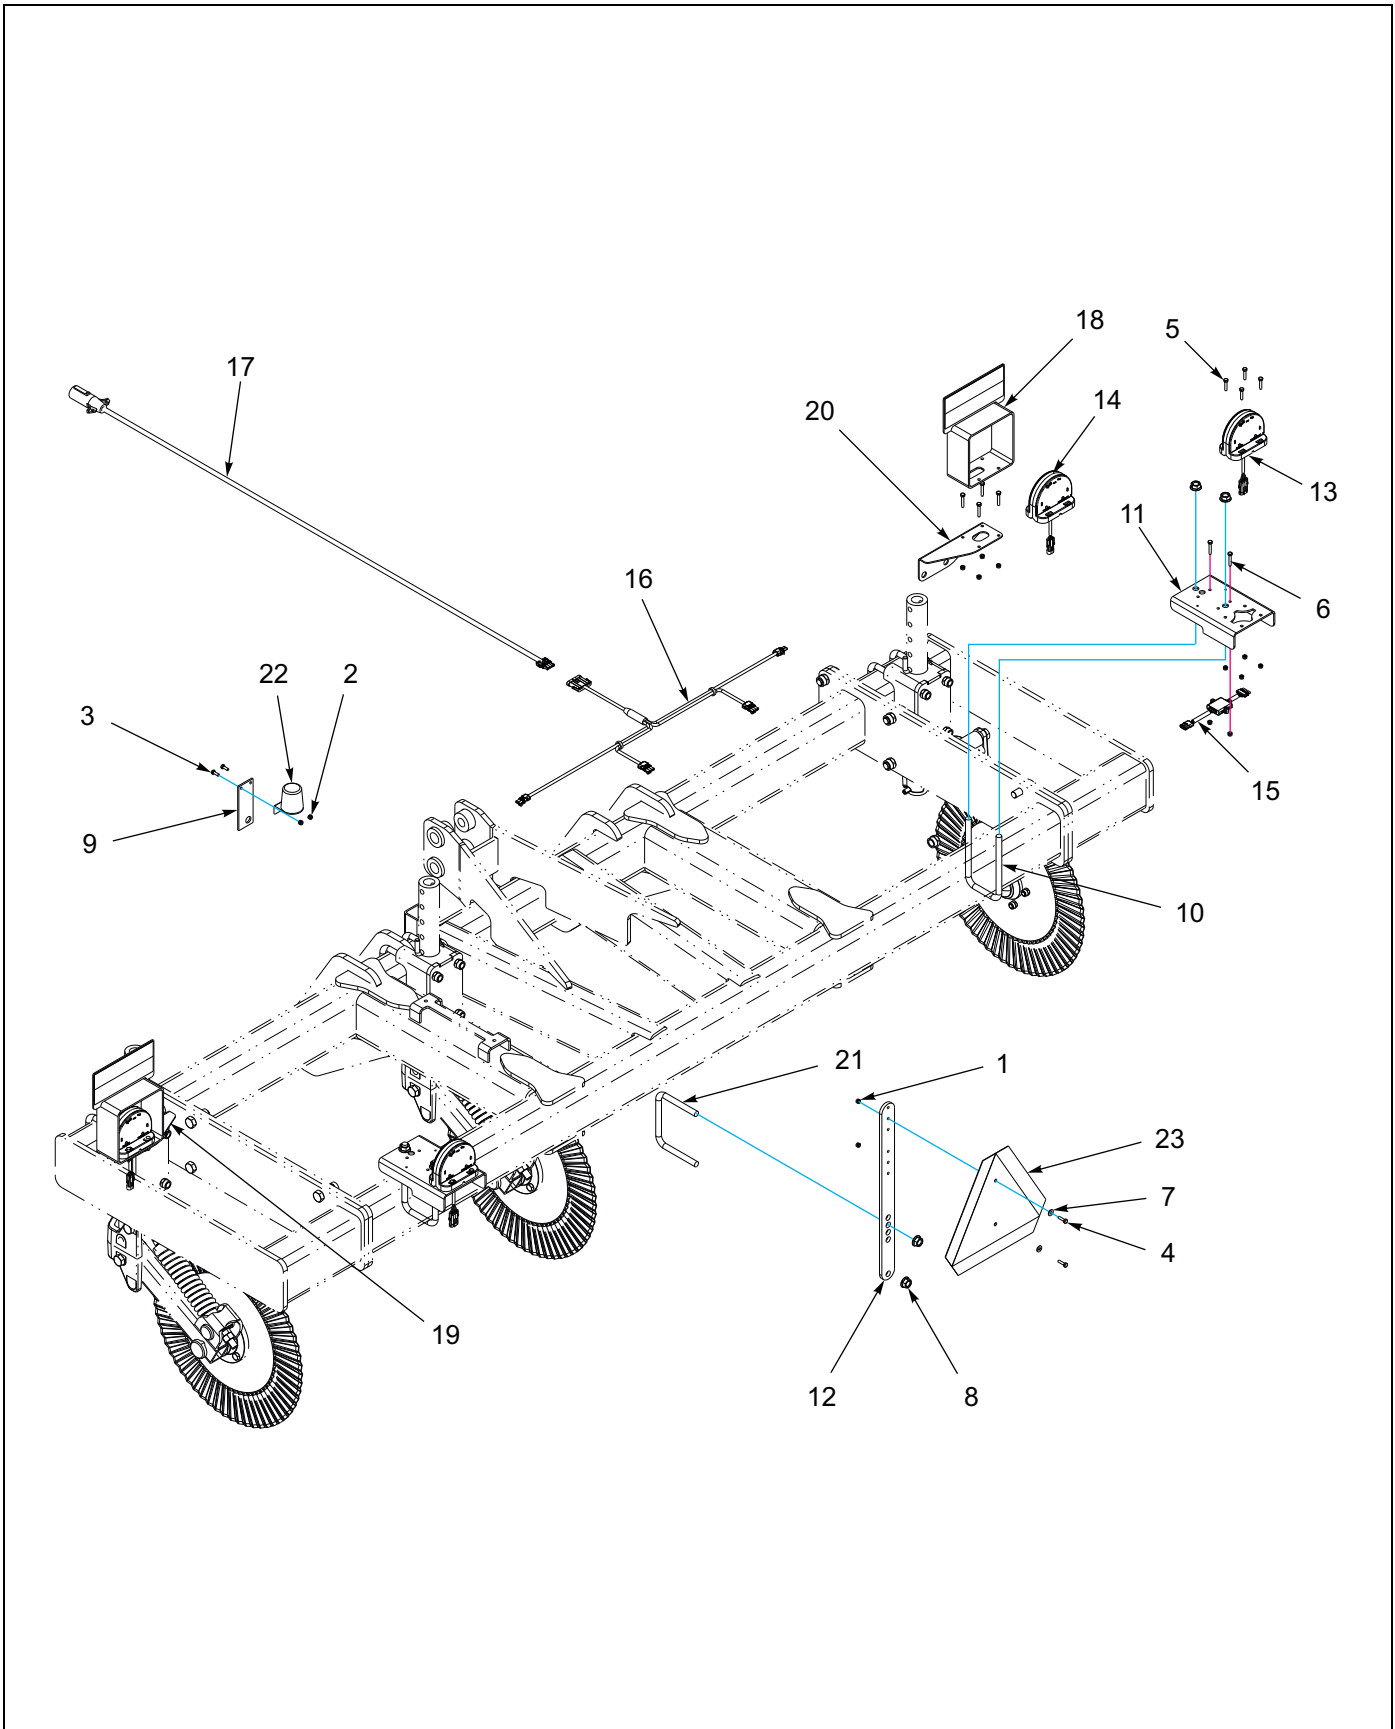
Electrical Assembly - Narrow 5 Shank
